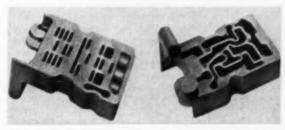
Valve body for the automatic transmission of a military vehicle. A dimensional tolerance of  $\pm 0.005$  in./in. is conventional for small shell castings.
